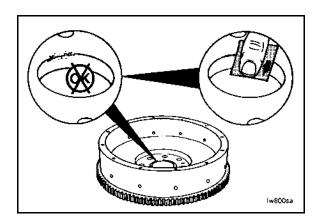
INSPECT THE FLYWHEEL FOR CRACKS, NICKS AND BURRS
